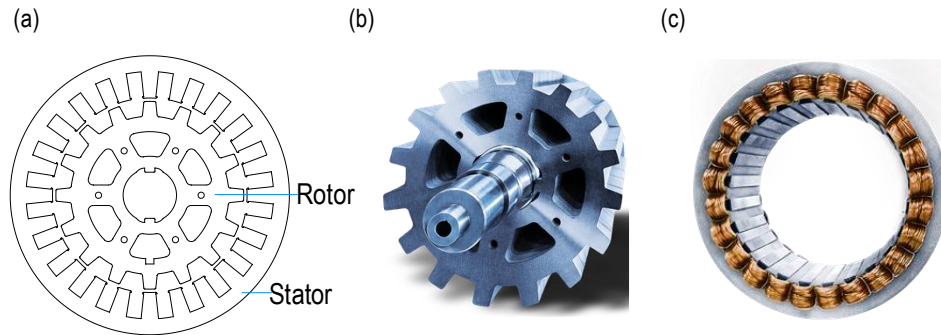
Geometries of rotor and stator in the 24/16 SRM (a) CAD geometry, (b) rotor-shaft, and (c) stator-winding.
